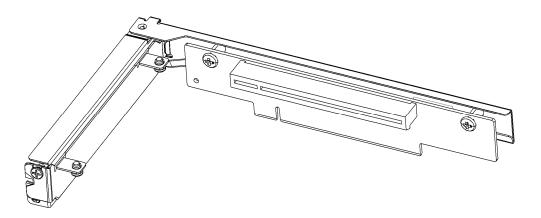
Intel[®] Server System SR1695WB PCI Express* Riser Assembly
